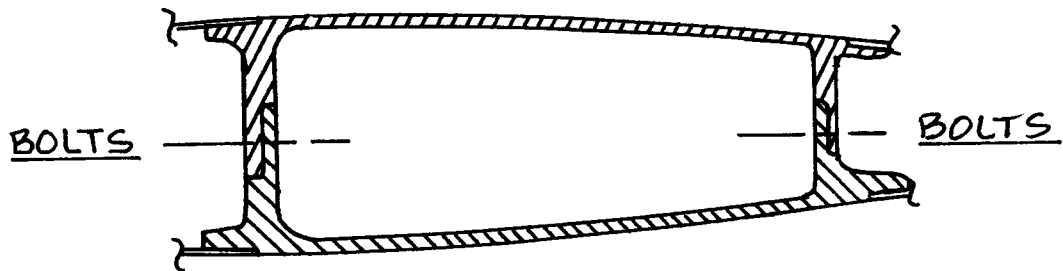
Manufacturing a Wing Torquebox in Two Pieces
